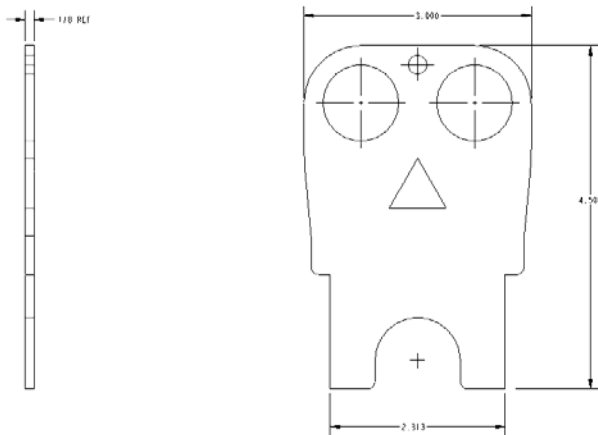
Tensioner Gauge Tool (300-B-179)
